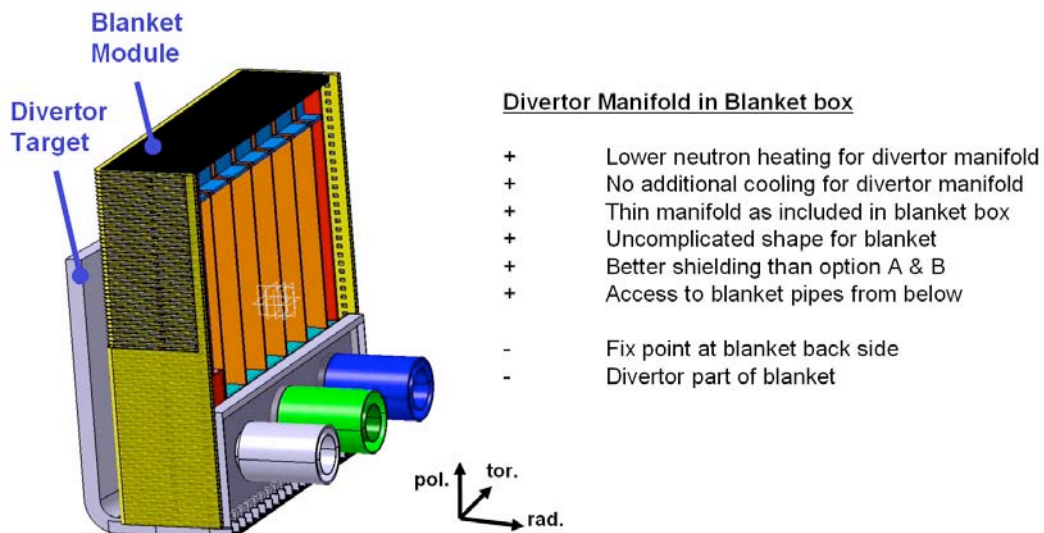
Cutting & re-welding scheme applying cut-outs in the HT shields along with a divertor target in front of the blanket module and a tapered divertor main manifold placed in a cut-out within a blanket box
